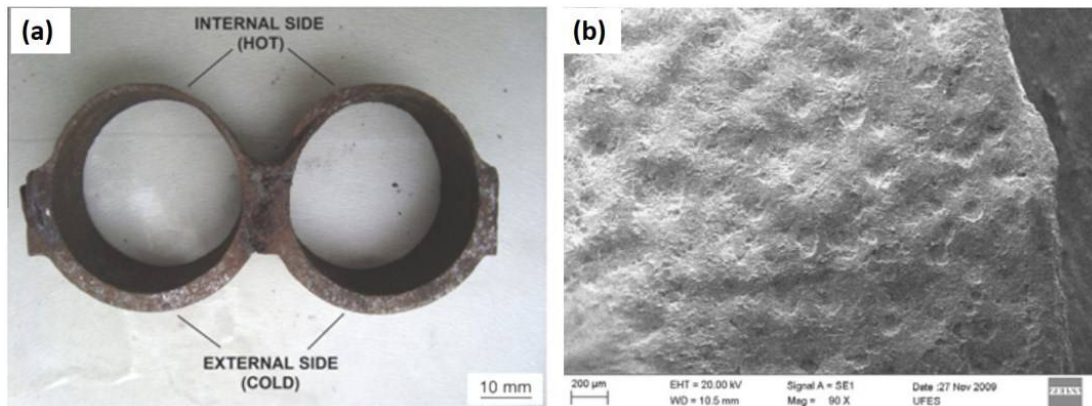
Erosion Failure (a) Photograph of boiler tube indicating erosion on fire side surface (b) SEM micrograph of eroded surface (11)
